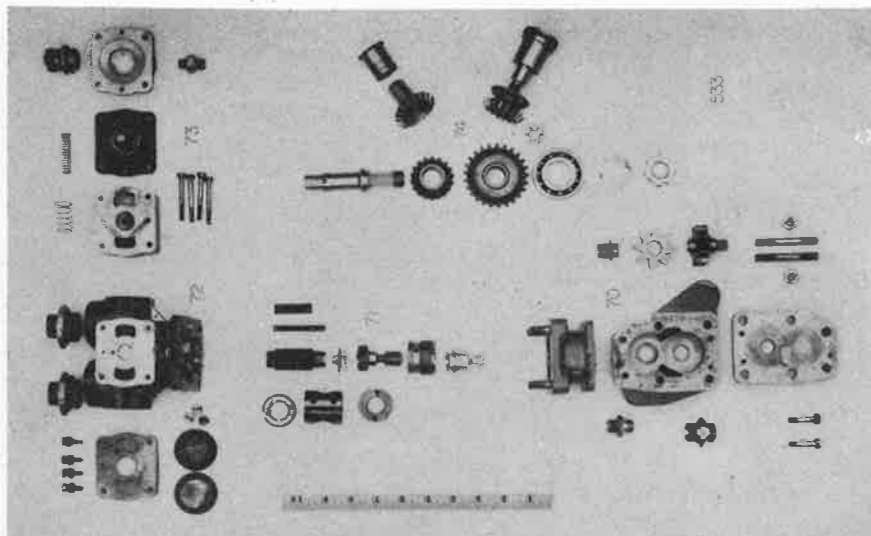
Fuel Pump Disassembly (CSE-2963). 28986
